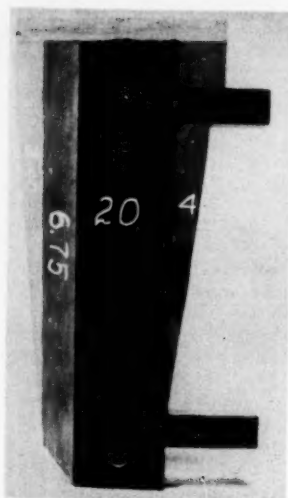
The 1-in. section of the pattern for a double-flanged gear blank is shown with the tapered pad added to promote feeding, and which must be considered in calculating riser dimensions.
